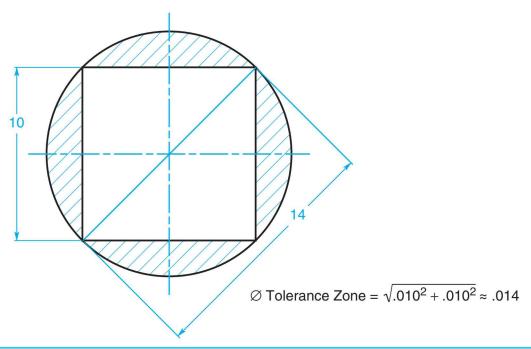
A cylindrical tolerance zone provides a uniform distance from the axis to the tolerance zone boundary.
